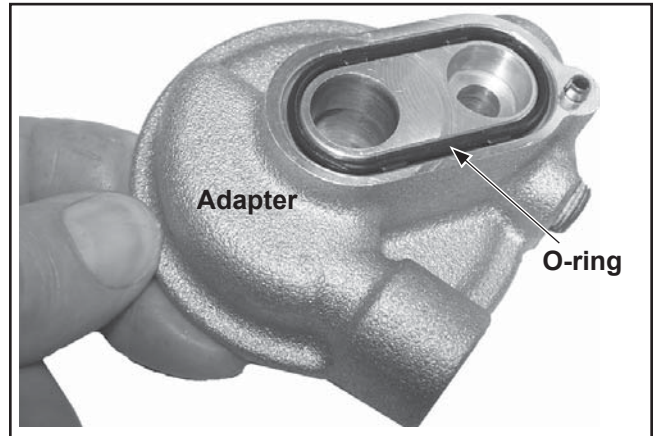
Installing Oil Pump Outlet Tube.
